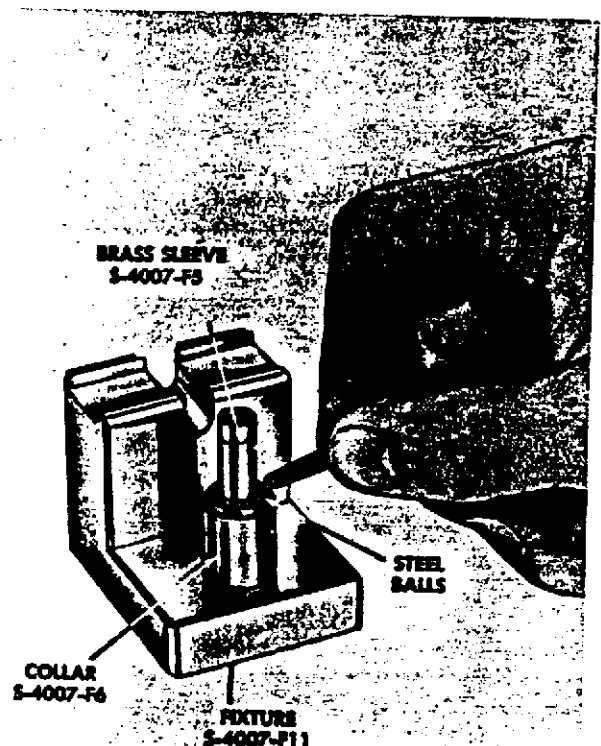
, Reassembly of Counter Gear and Shuttle Shafts
